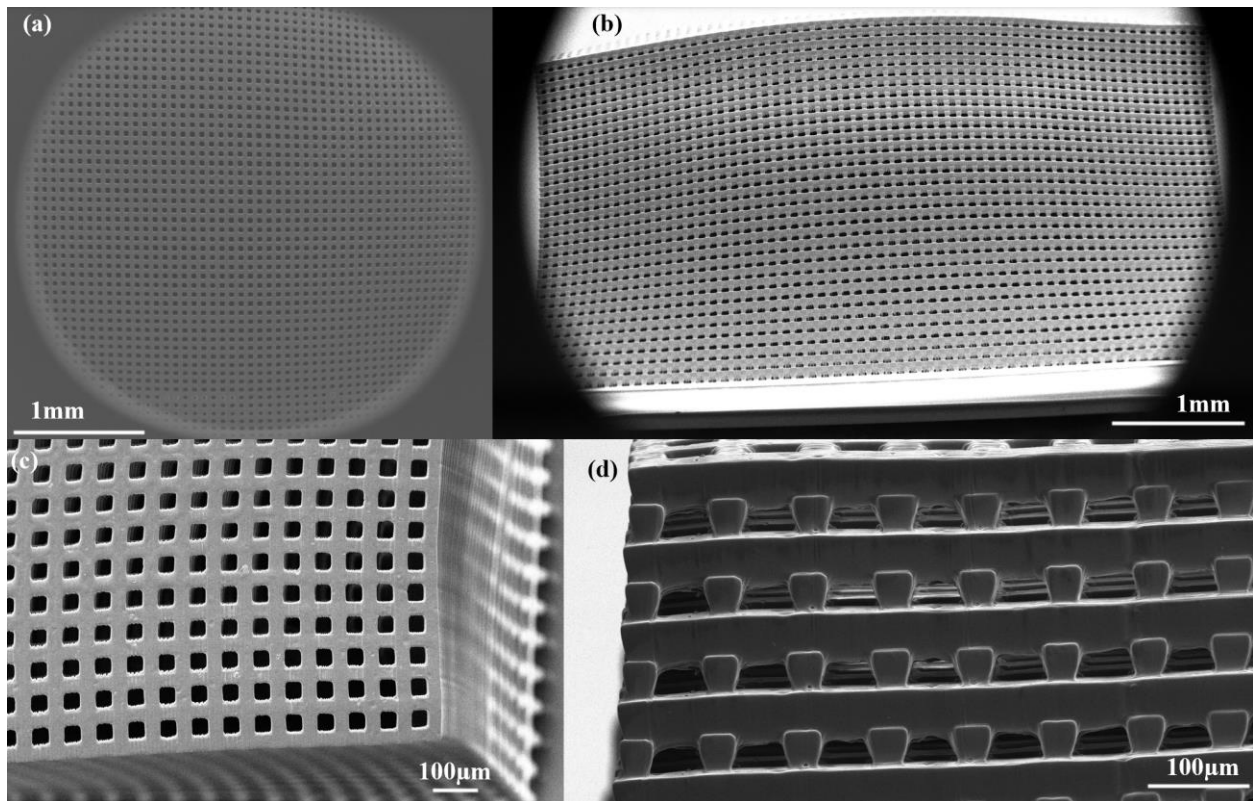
the cubical structure printed with $40\mu\text{m}$ layer thickness, (a) the top view, (b) the side view, (c) the corner of top view, (d) the corner of the side view
